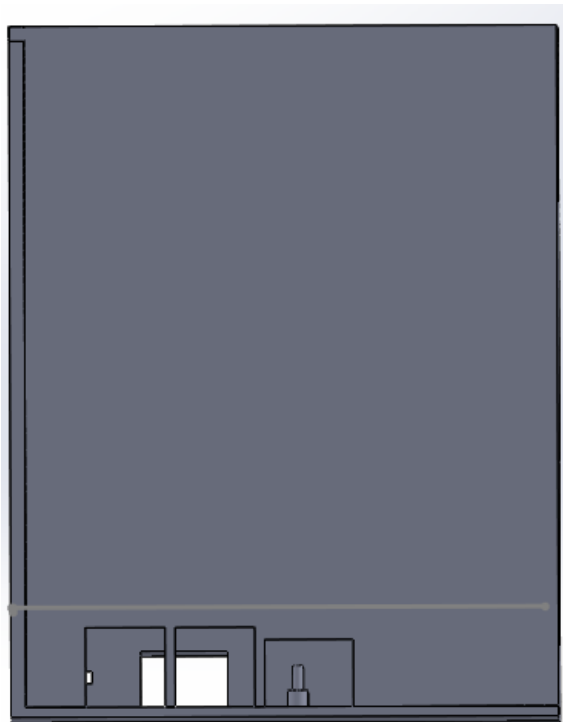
RaspiTAR Assembled Design - Left Side View
